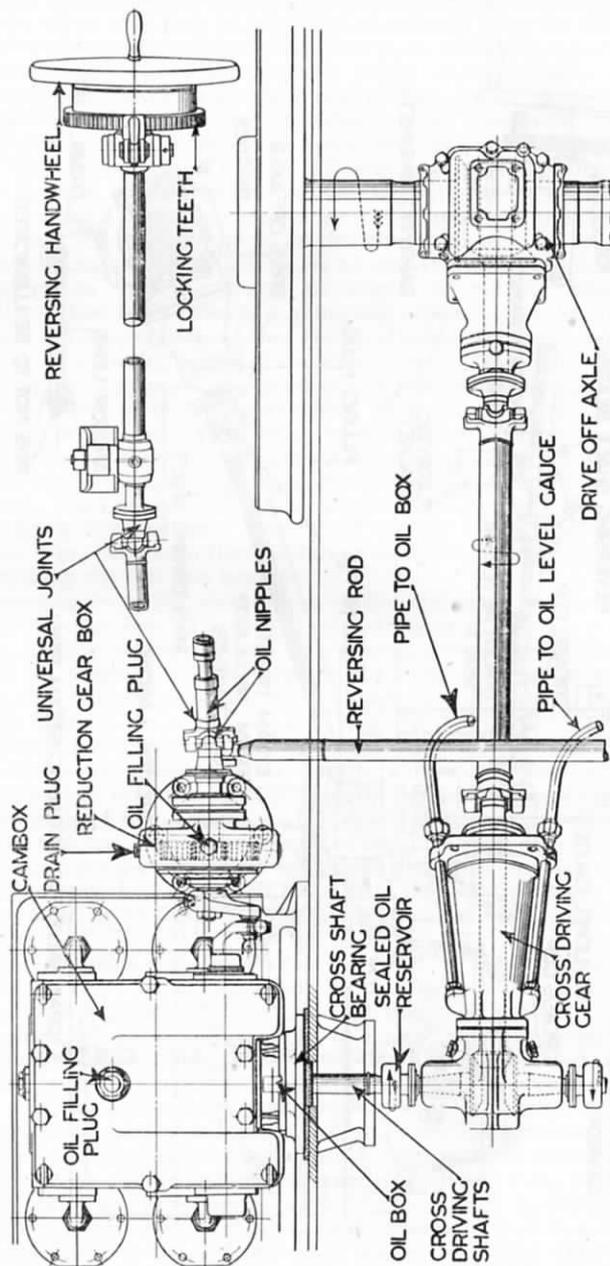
ARRANGEMENT OF CAPROTTI VALVE GEAR IN HALF PLAN
